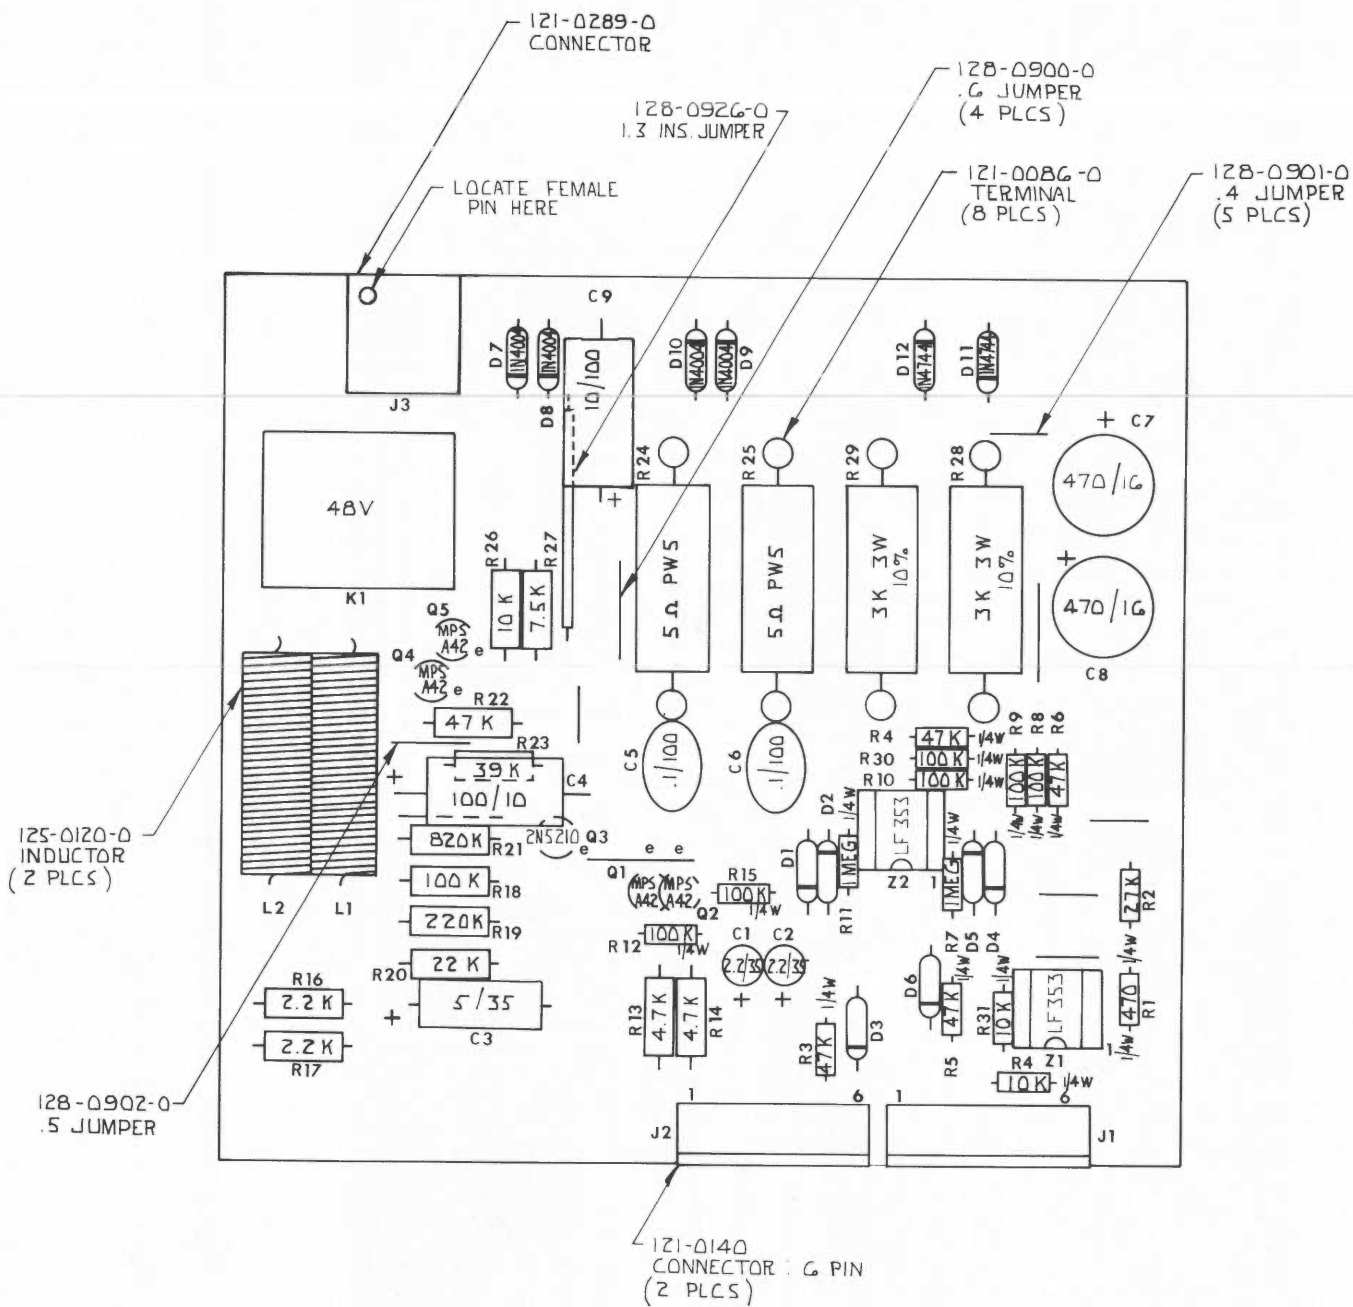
Assembly Diagram, A30 Relay PCB
